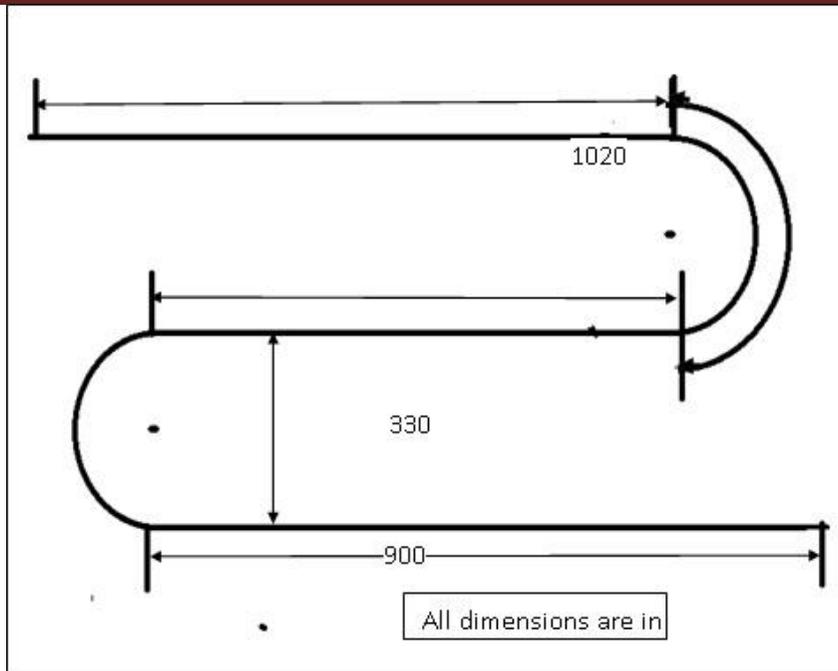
Tube in Tube Heat Exchanger Dimensions
